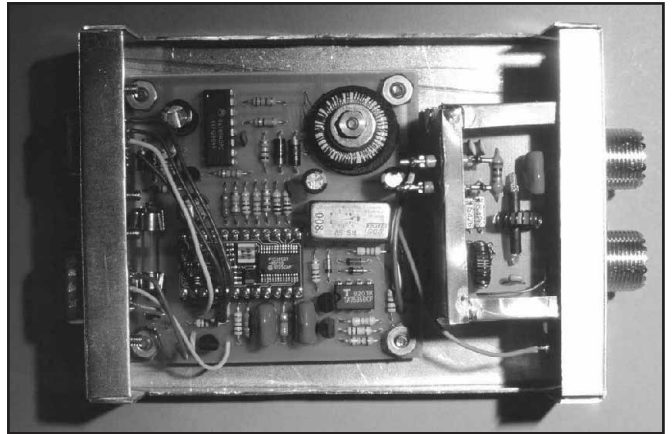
The case was built from two pieces of 1-mm aluminum sheet. The SWR sensor is held in place by the coax connectors and the soldered shield, while the main board is mounted to the case with four screws and spacers.
